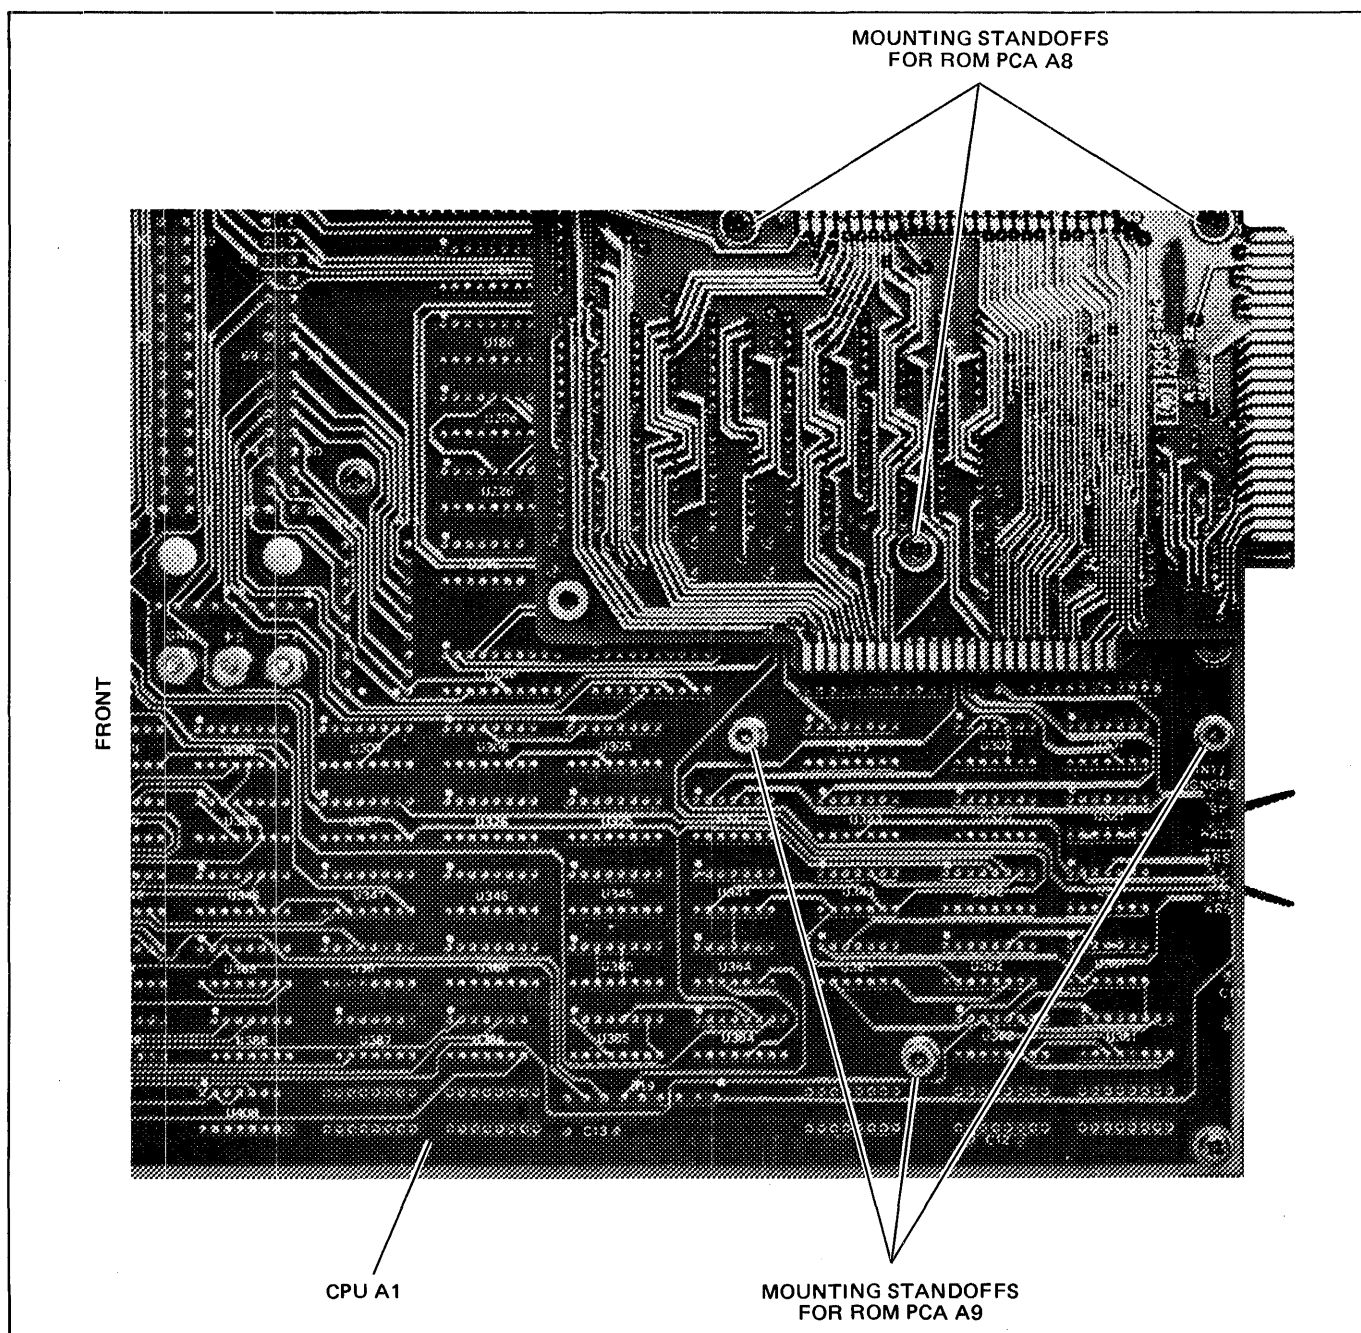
Bottom View of HP 21MX Processor (Bottom Cover Removed)
